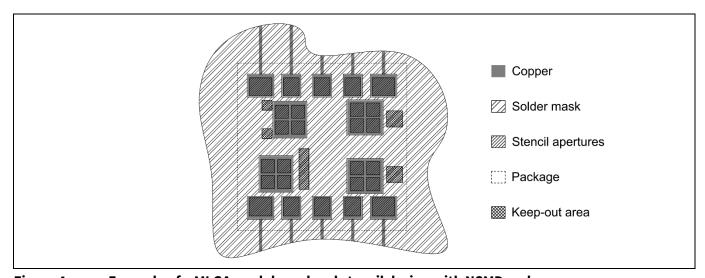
Example of a MLGA module pad and stencil design with NSMD pads.
